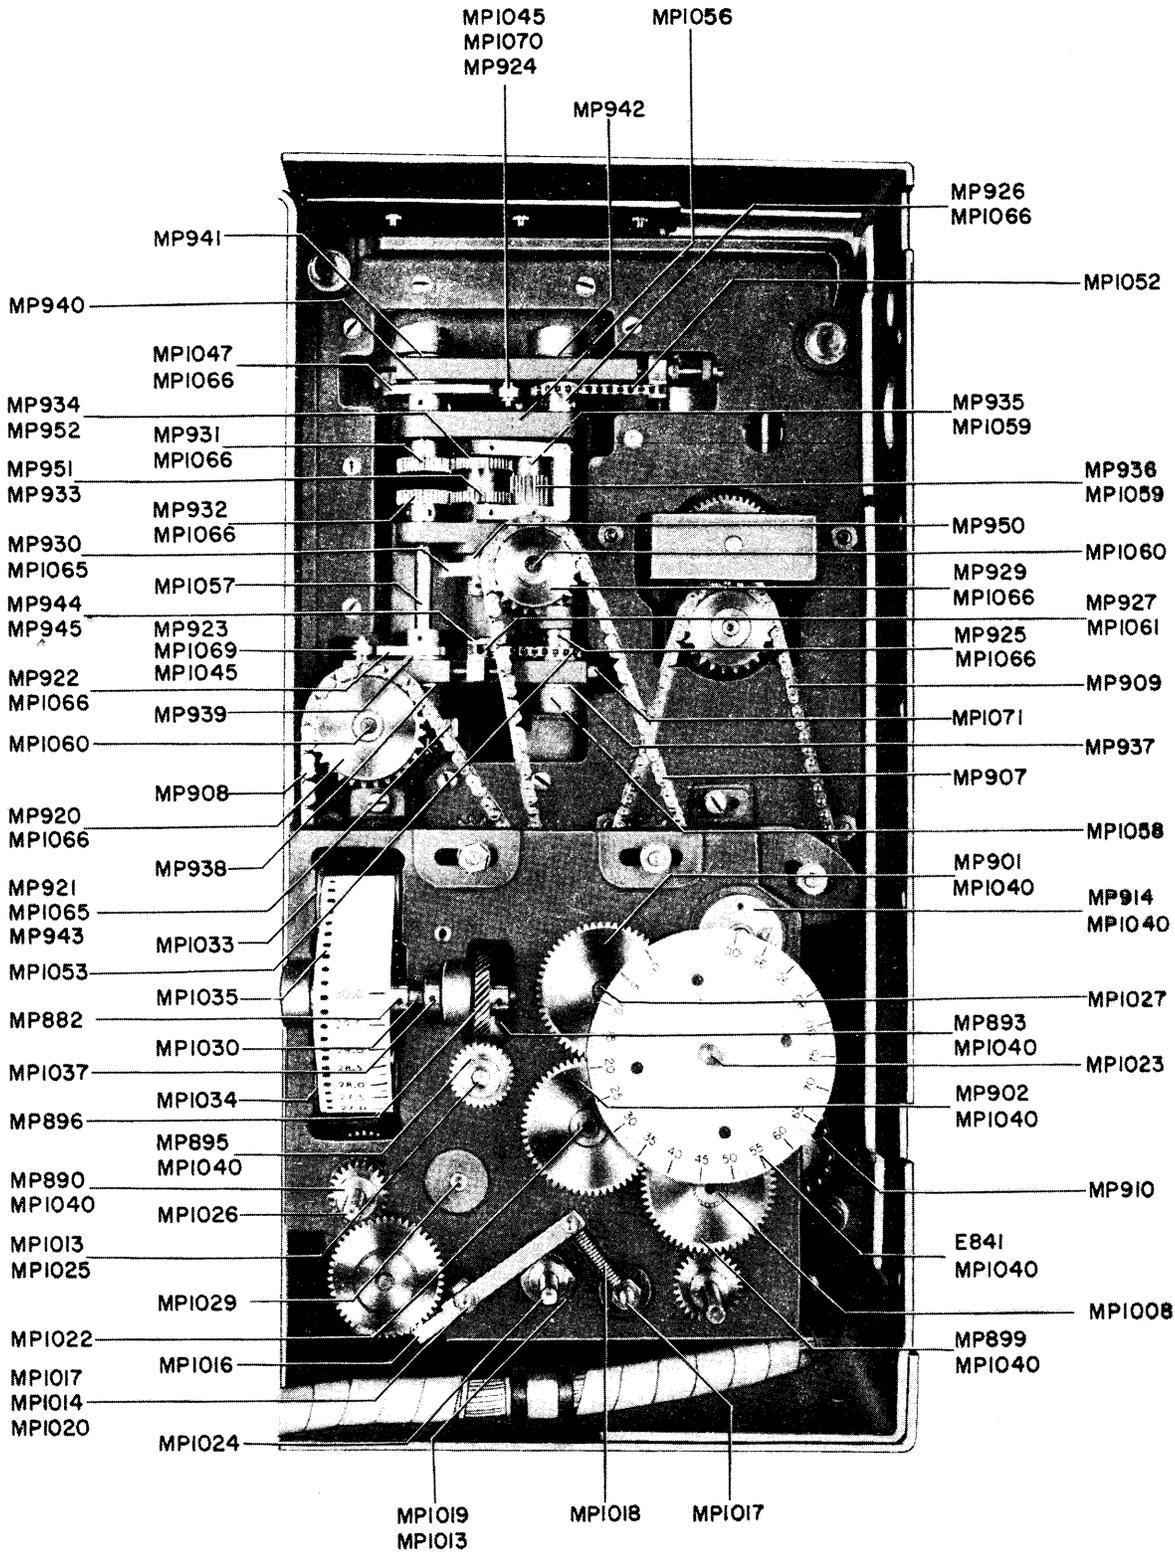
Tuning and Coupling Mechanism, L cati n f Parts on Front of Gear Train
